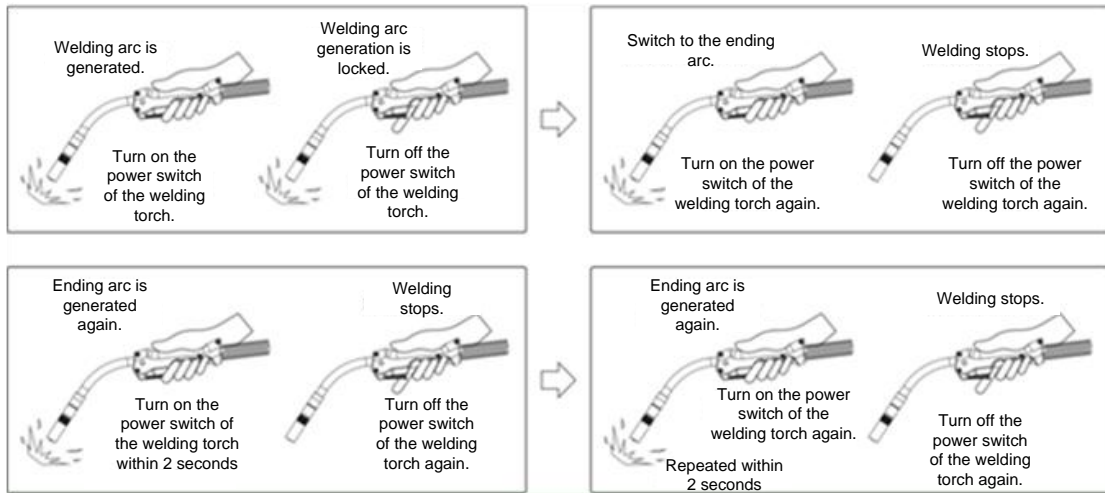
Schematic diagram of welding with repeated ending arc
